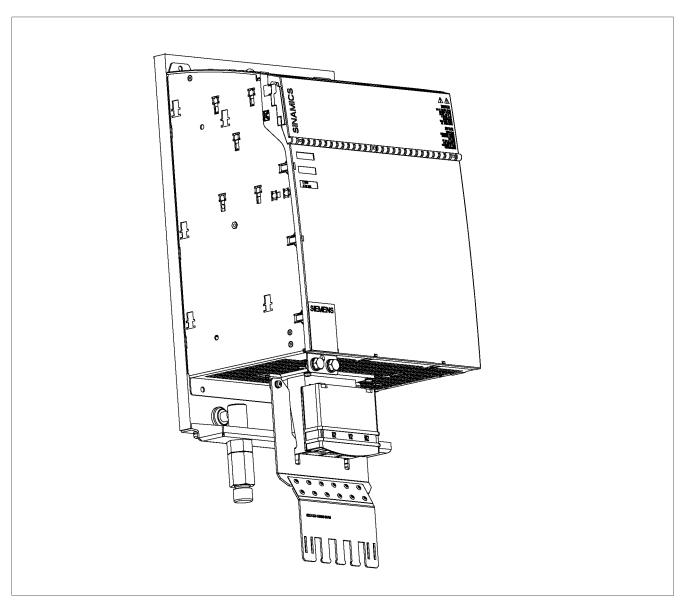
Shield connecting plate on a 300 mm Liquid Cooled module
